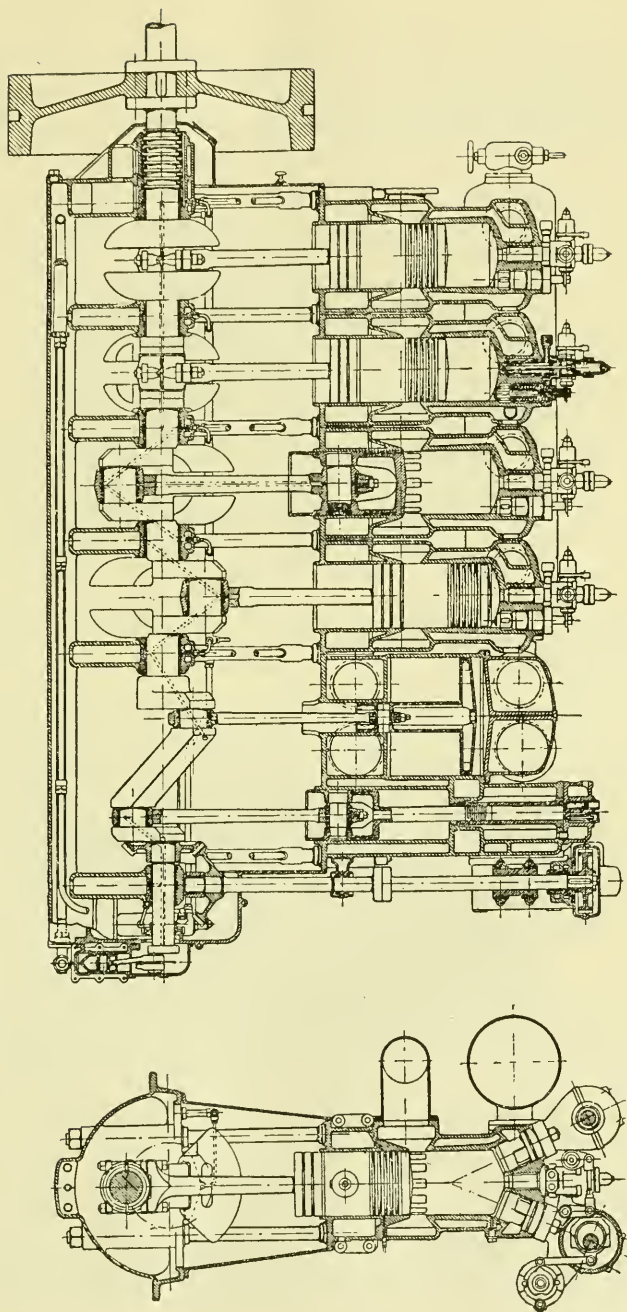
SECTIONAL DRAWING OF SULZER BROTHERS' TWO-CYCLE ENGINE
